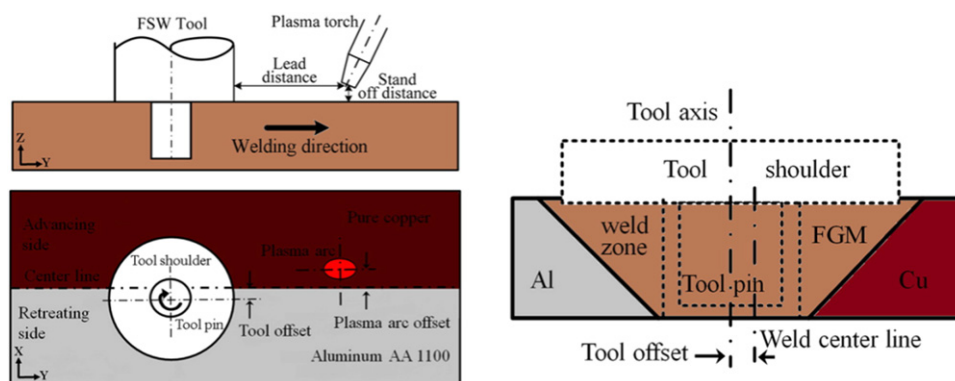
Schematic of plasma assisted friction stir welding process. Yaduwanshi, D., Bag, S., Pal, S., 2016. Numerical modeling and experimental investigation on plasma-assisted hybrid friction stir welding of dissimilar materials. *Materials and Design* 92, 166–183.
